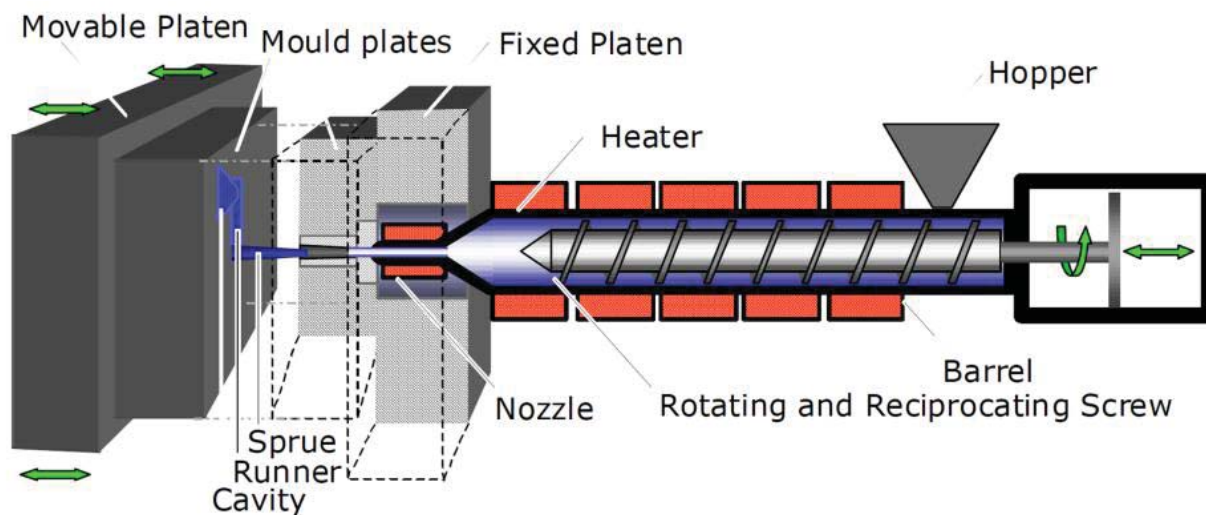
Injection molding machine with reciprocating screw (Wesselmann, 1998)
